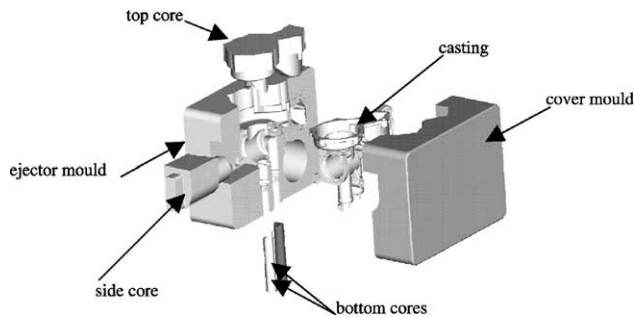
The 3D solid model of die casting dies of die casting water pump in open state.
